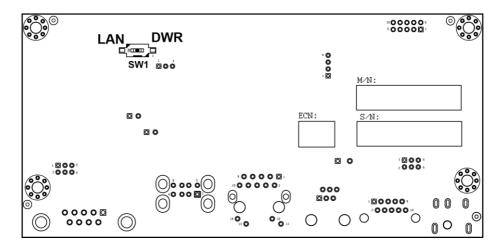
MR-5100RA-5 Daughter Board Component Locations (Bottom View)
